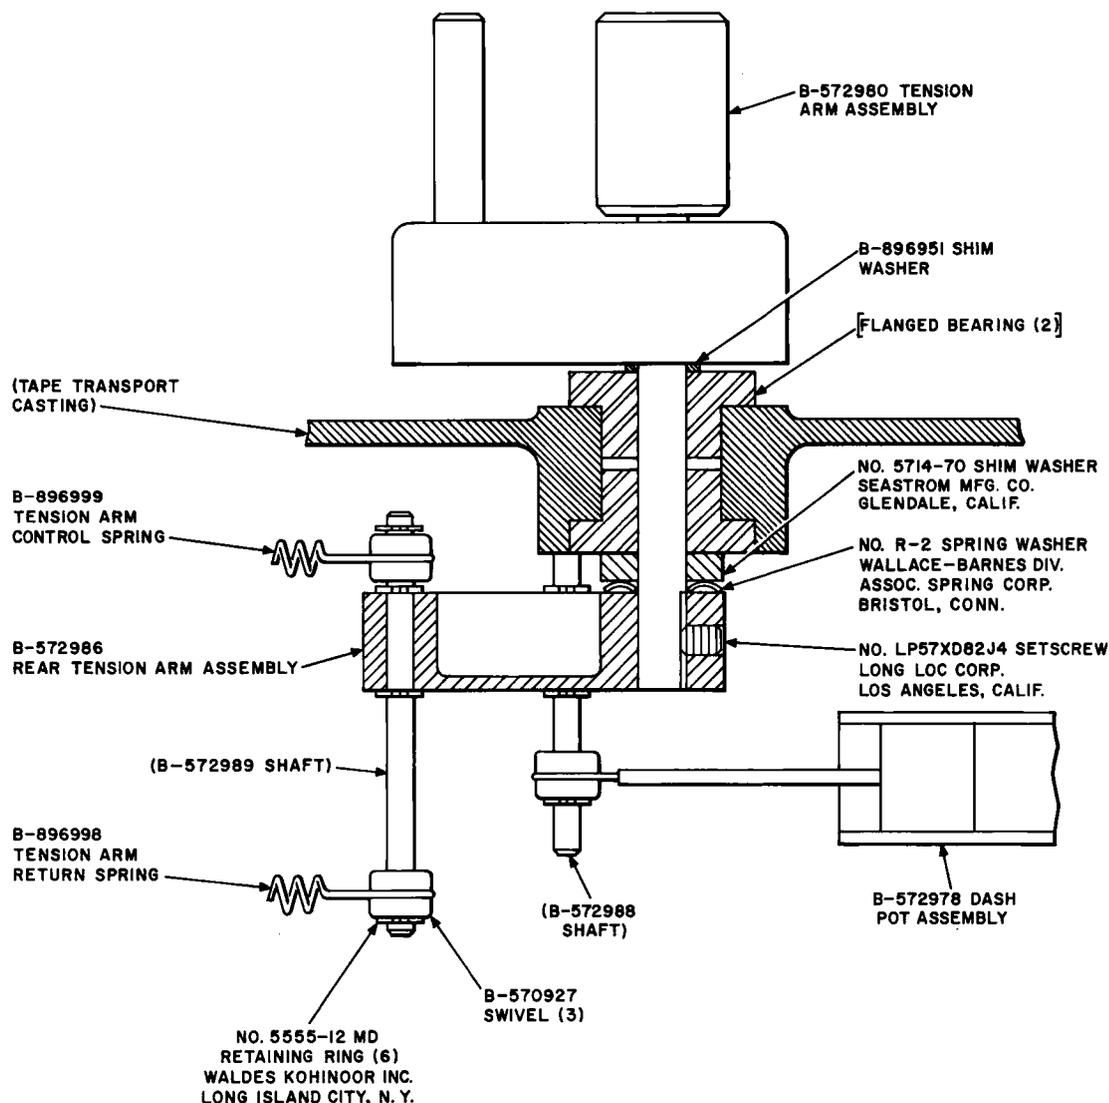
Sectional View of Supply Tension Arm and Associated Parts
